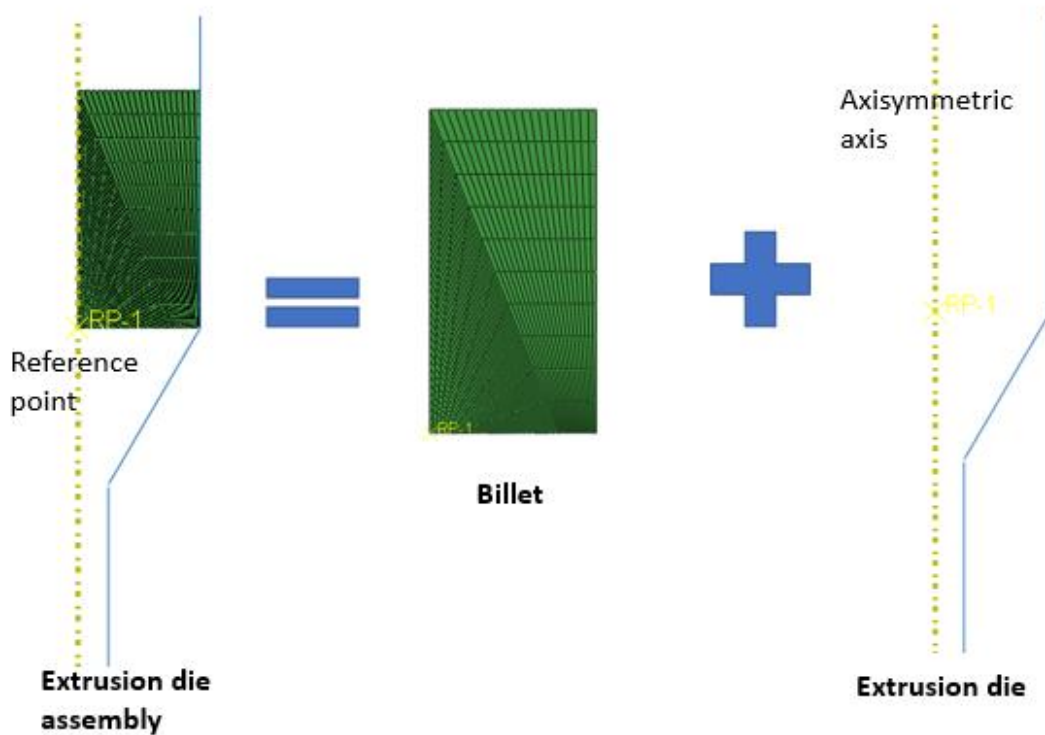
Extrusion die assembly model (it is composed of billet and extrusion die).
